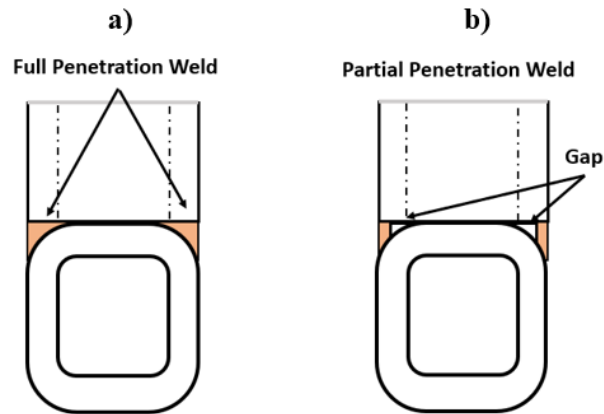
a) Complete joint penetration FBG weld b) PJP FBG weld.
